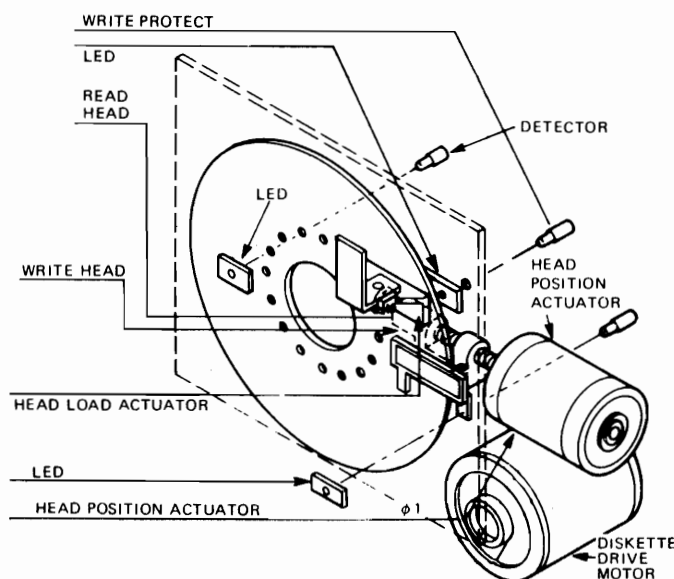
Model 2270 Diskette Mounted in a Diskette Drive. Access Assembly, Carriage, and Read/Write Head Are Shown.
